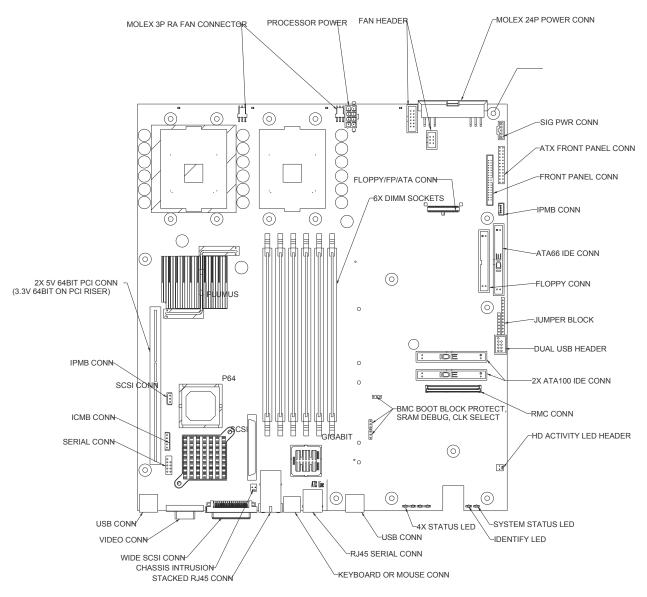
Intel[®] Server Board SE7501WV2 Mechanical Drawing
